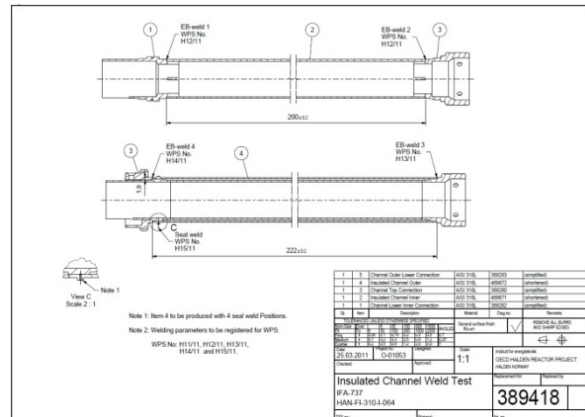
The drawing of the insulated channel weld test specimen for WPS.
